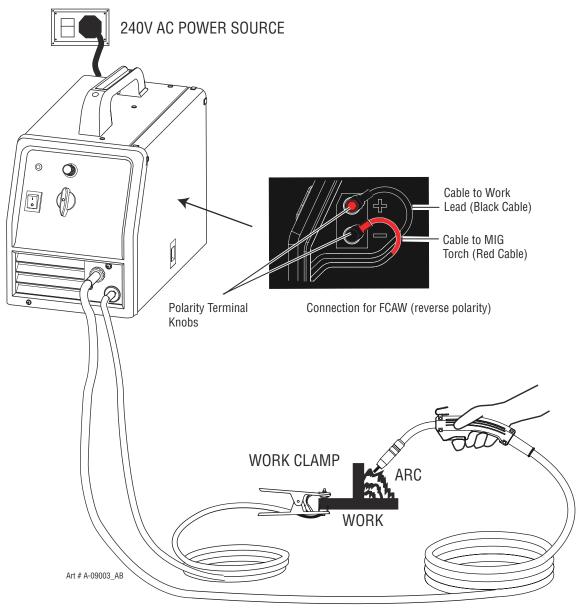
Gasless Set-up for WeldSkill 135 MIG
